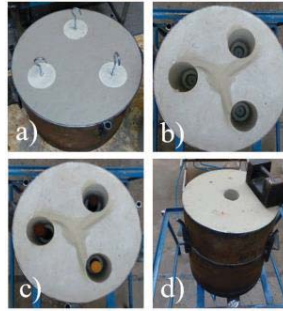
Steps of the expendable mold-making process: a) lower part with the cores, b) tangential access channel without cores and, c) with core, d) lower and upper molding box
